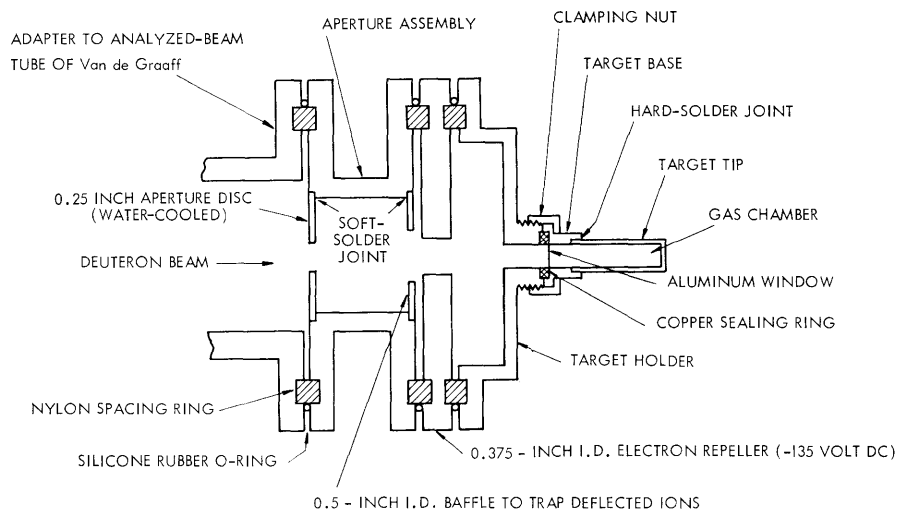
Collimation system for gas target assembly. Aperture assembly, electron repeller, and target holder are held together by iron bolts covered with teflon tubing; use of fiber washers makes these joints electrically insulating. Water-cooling of 0.25-inch I. D. aperture disc and target holder is not shown.
